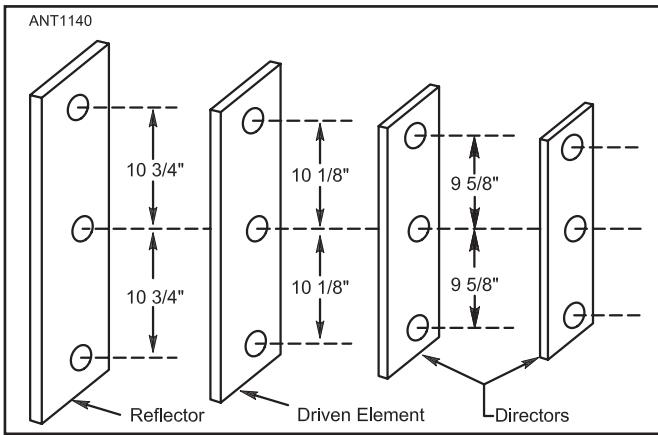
Dimensions for the pine element spreaders for the 144-MHz 4-element quad.
